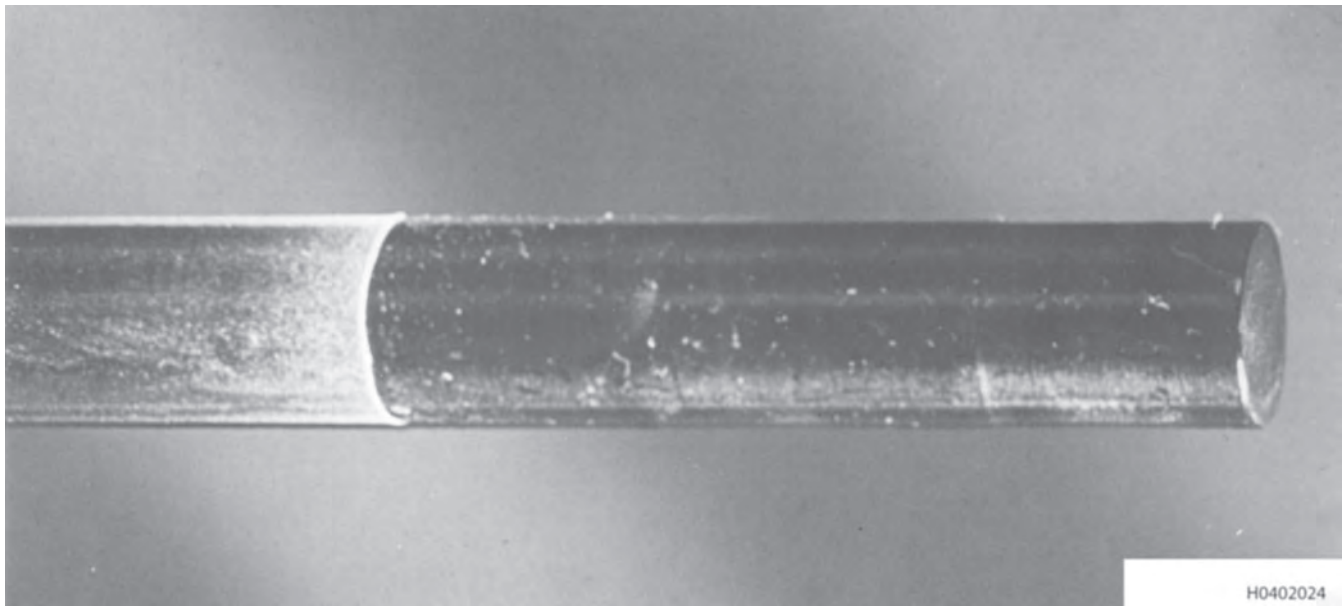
Particle Indication at the Weld Between a Soft and a Hard Steel Rod
